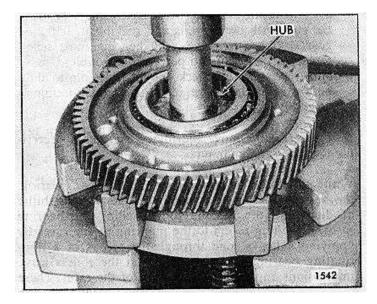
Pressing Hub Out of Idler Gear Bearing
